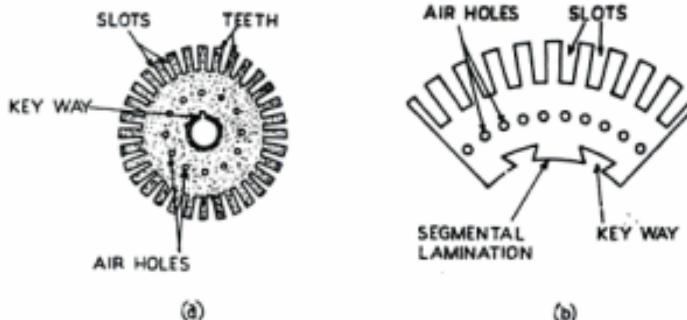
Armature of a d.c. motor showing the laminations
